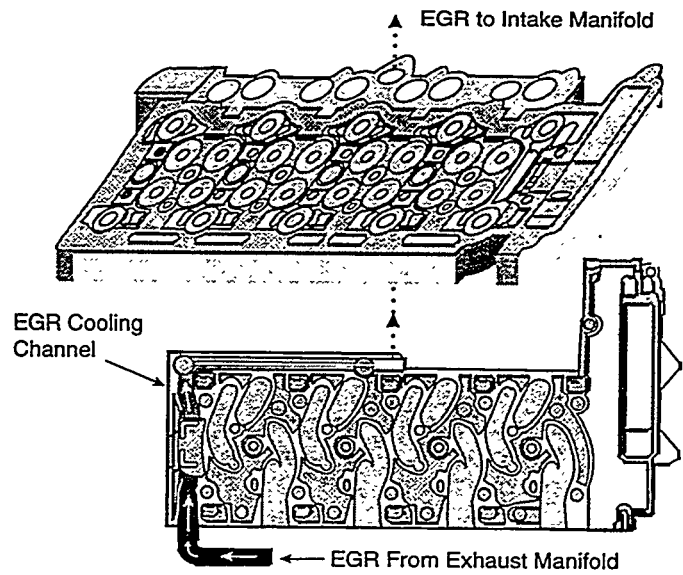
Exhaust Gas Recirculation Channel for the ECOTEC 2.0 Engine [3]. (shown are two horizontal slices through cylinder head. Lower slice shows routing of internal EGR passage through cylinder head from exhaust side to intake side. Upper slice shows exit of EGR passage after EGR passes through upper slice)
